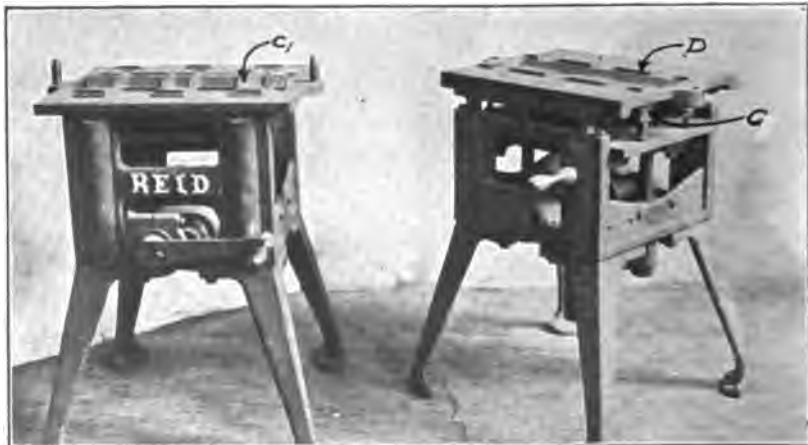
Cope and Drag Machines with Pattern in Position for Molding
